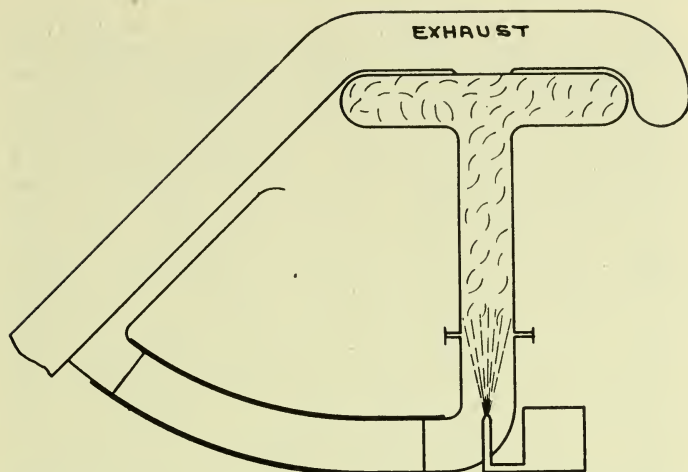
MANIFOLD CONSTRUCTION TO SUPPLY HEAT TO THE AIR CHARGE BEFORE IT ENTERS THE CARBURETER
